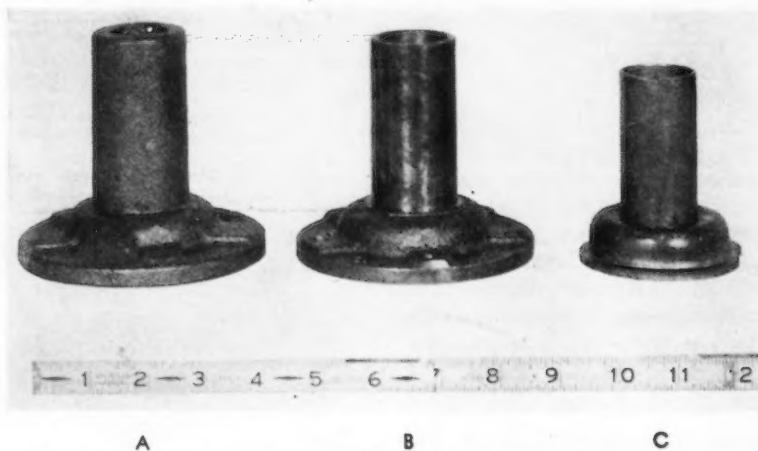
Metal-envelope vacuum tube parts (at left) are copper brazed to supplement spot welding.
